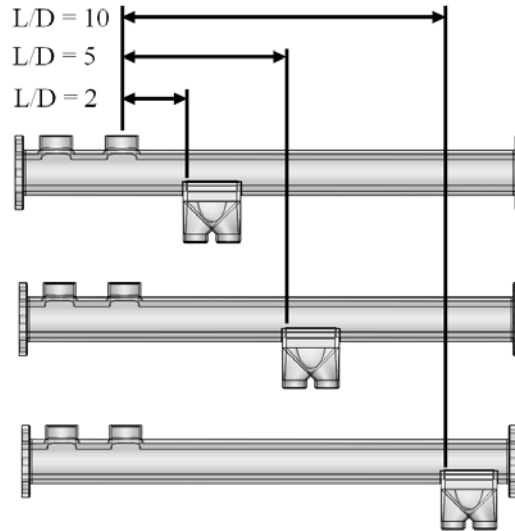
Screw mixer housings featuring dimensionless mixing lengths of  $L/D = 2$ , 5, and 10, respectively.
